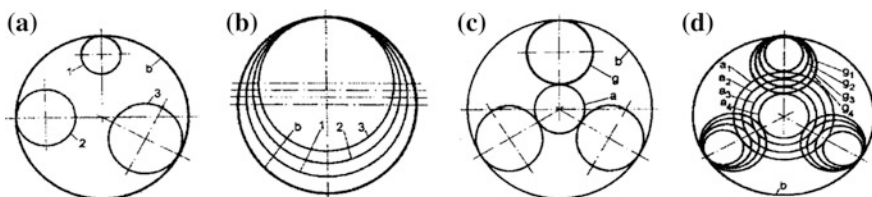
Gear trains with real and conditional connecting units: a A machine-tools unit-head (the real connecting unit is the gear with internal teeth-“b”); b A family of planetary gearings K-H-V (conditional connecting component is a gear with internal teeth “b”); c Planetary gear 2K-H with *three streams* (with a real connecting unit—satellite pinion “g”, integrated in the external and internal gearing); d A family of planetary gears 2K-H (the real connection units—pinions “g” and the conditional connecting component—ring gear “b”)
